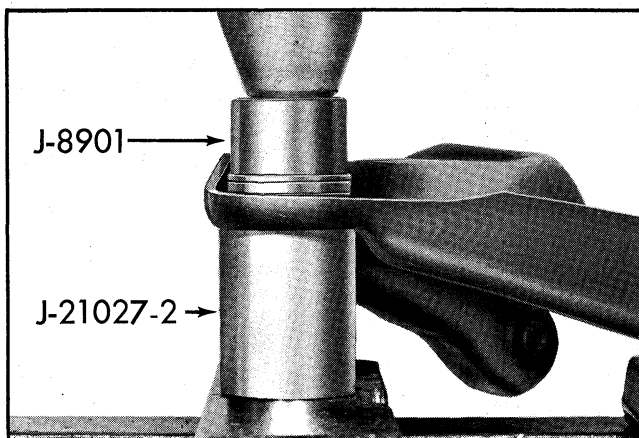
Installing New Ball Joint in Lower Control Arm
